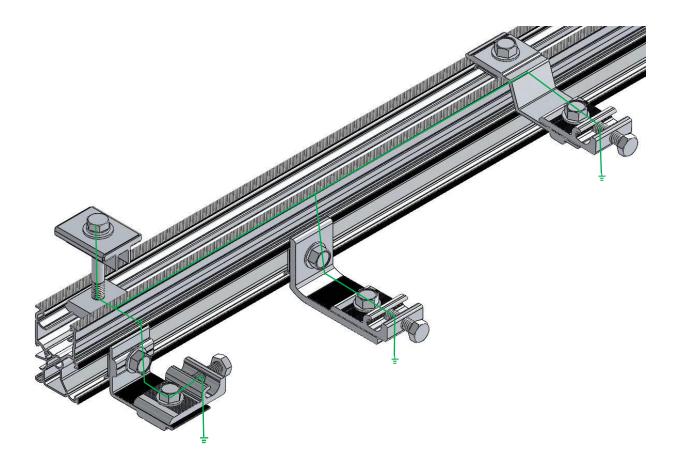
Grounding Path for Top and Side Mounts (Mill Finish Shown)
